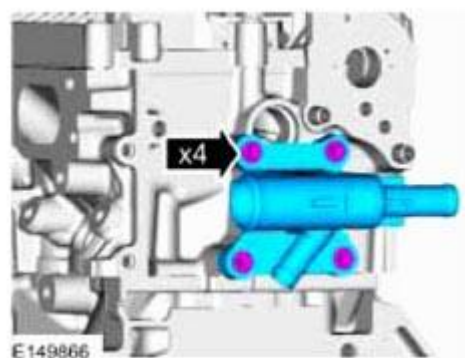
Locating Coolant Outlet Connector Assembly Bolts
